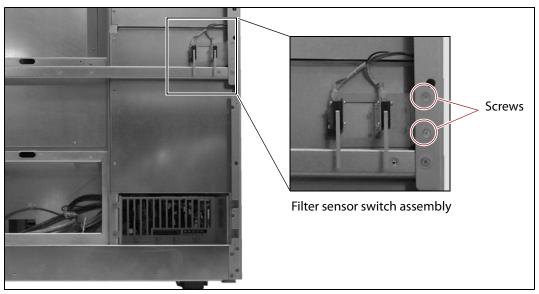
Remove the screws securing the filter sensor switch assembly to the frame.
